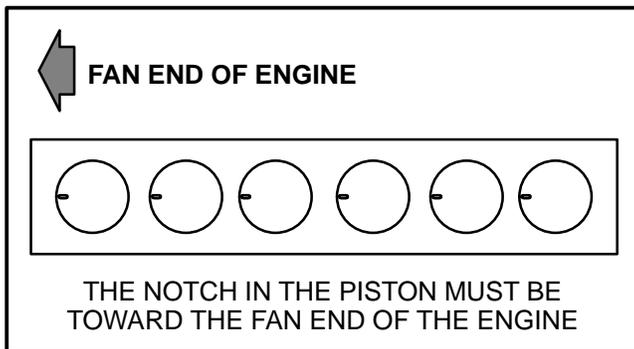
POSITION OF THE PISTON IN THE CYLINDER
